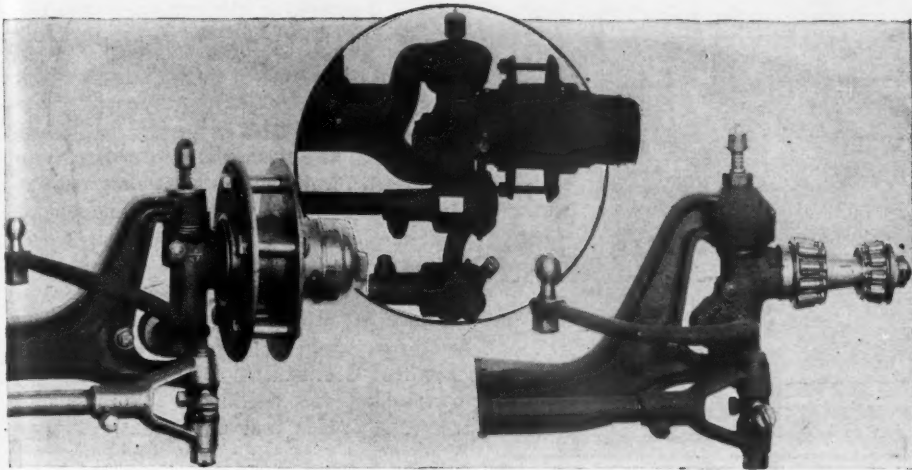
STEERING KNUCKLE OF TIMKEN TRUCK AND PLEASURE CAR AXLES WITH PLAIN AND ROLLER BEARING KNUCKLES
